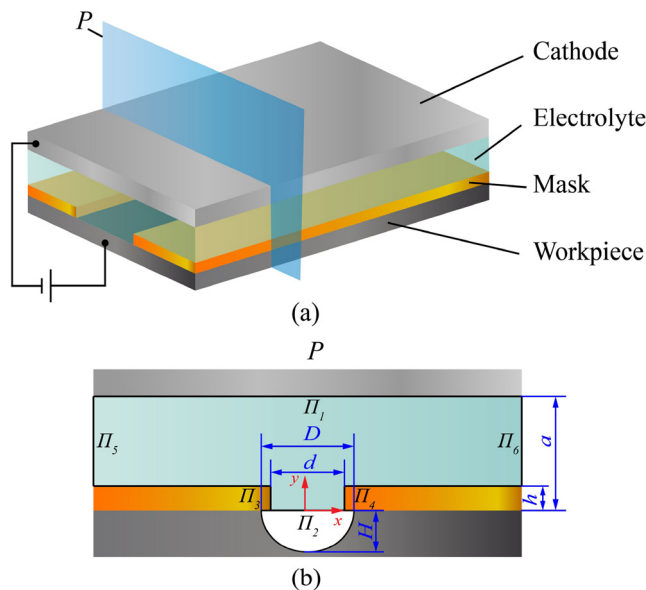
Model of micro-groove machining by through-mask EMM: (a) schematic; (b) geometrical model.
